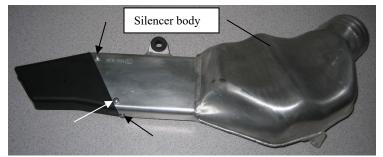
Right side of complete silencer with arrows identifying the three screws that hold the end cap to the silencer body.
